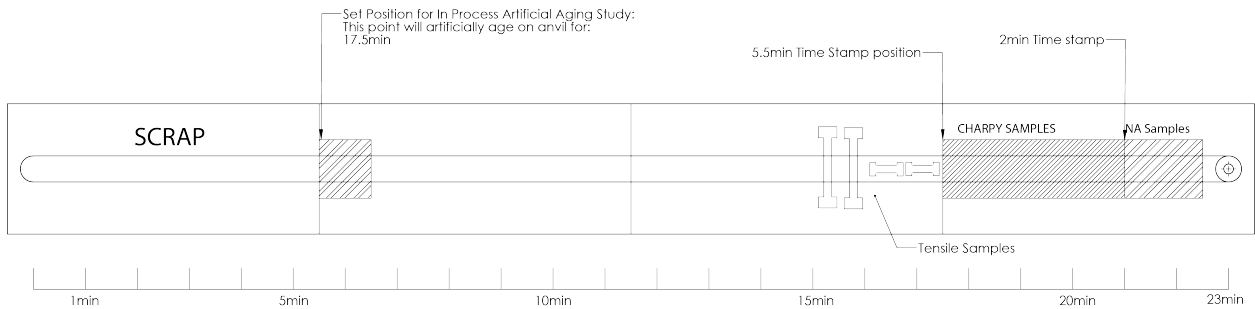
Sample removal diagram for welds ran at 50 mm/min
